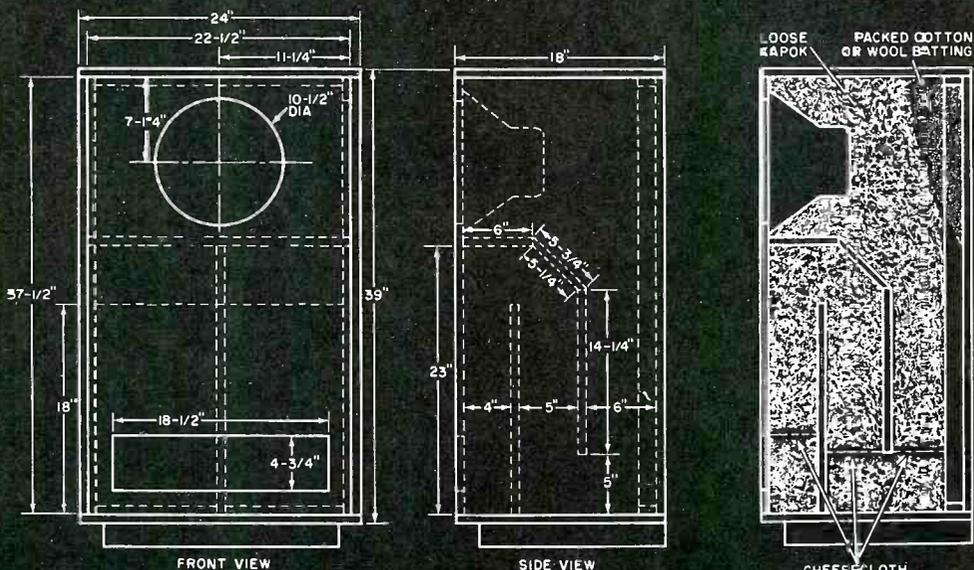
Overall dimensions are provided in front view drawing of phase inverter enclosure (above). Location and mounting dimensions of interior panels are shown in the side view. At upper right, finished cabinet is packed with kapok, while interior surfaces are lined with a thin layer of cotton or wool batting.
